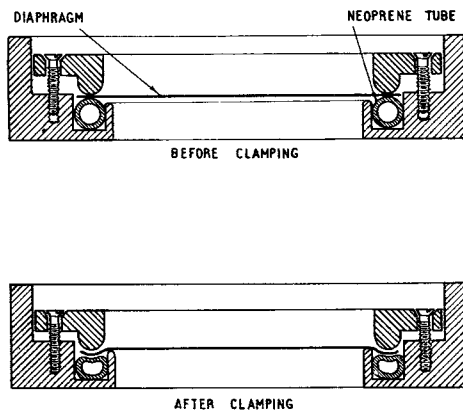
A TENSIONING FRAME FOR DIAPHRAGM OF LAPPING MACHINE.
